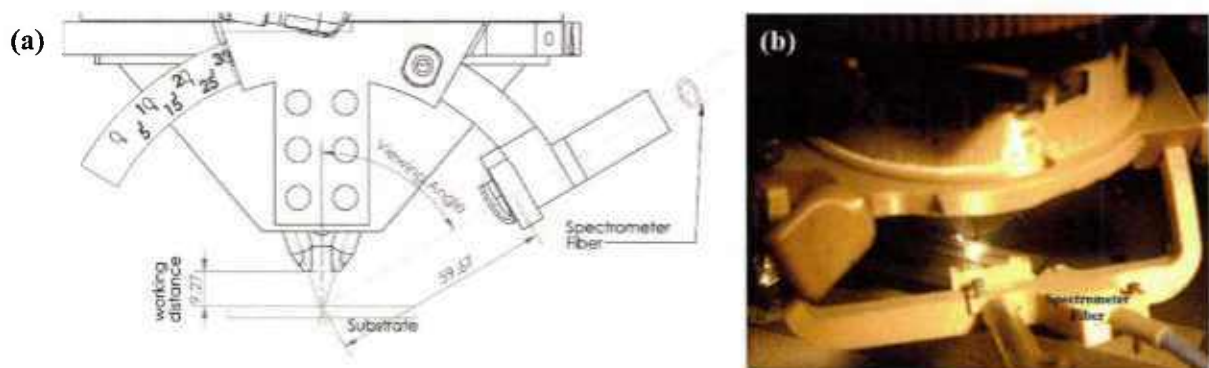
(a) LENS processing head with custom-build, sensor-mounting fixture. (b) Image of fixture, taken during processing, showing spectrometer fiber.
